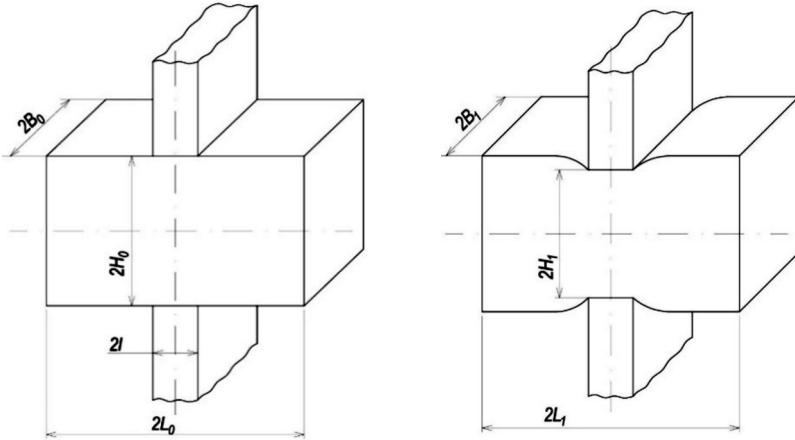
The workpiece is in an undeformed state Fig. 2. The workpiece is in a deformed state
